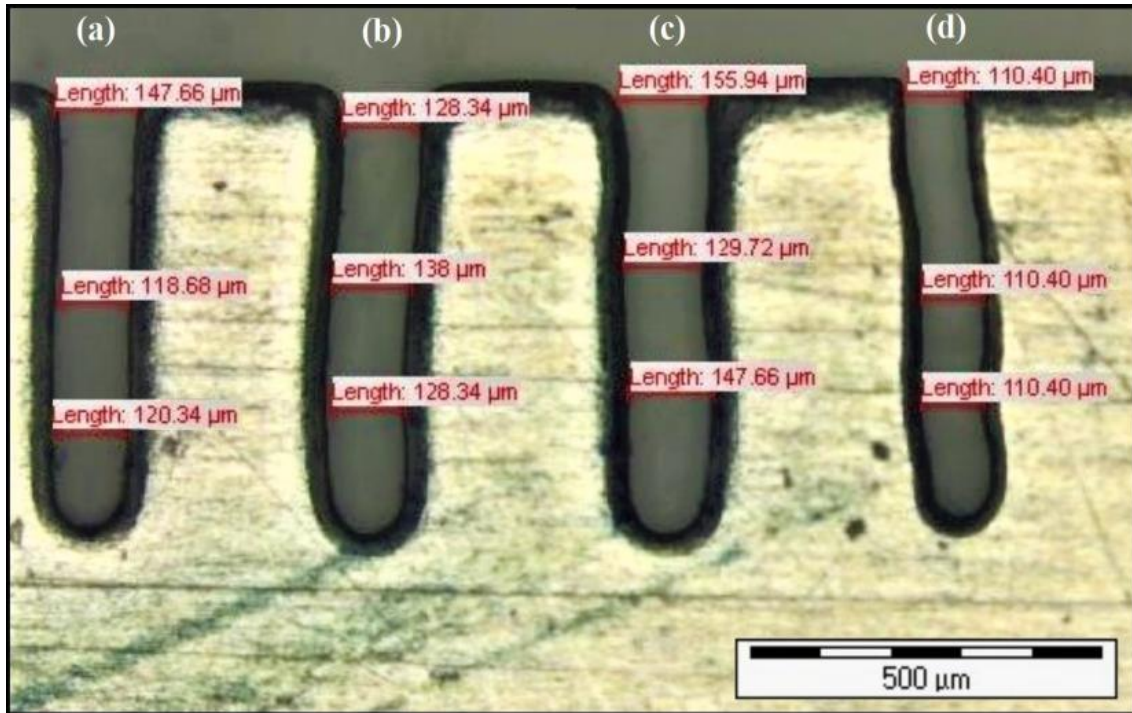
Vibration assisted axial nozzle jet flow WECM machined micro-slits at different workpiece nozzle stand-off distance (a) 15mm (b) 10mm (c) 20mm (d) 5mm
